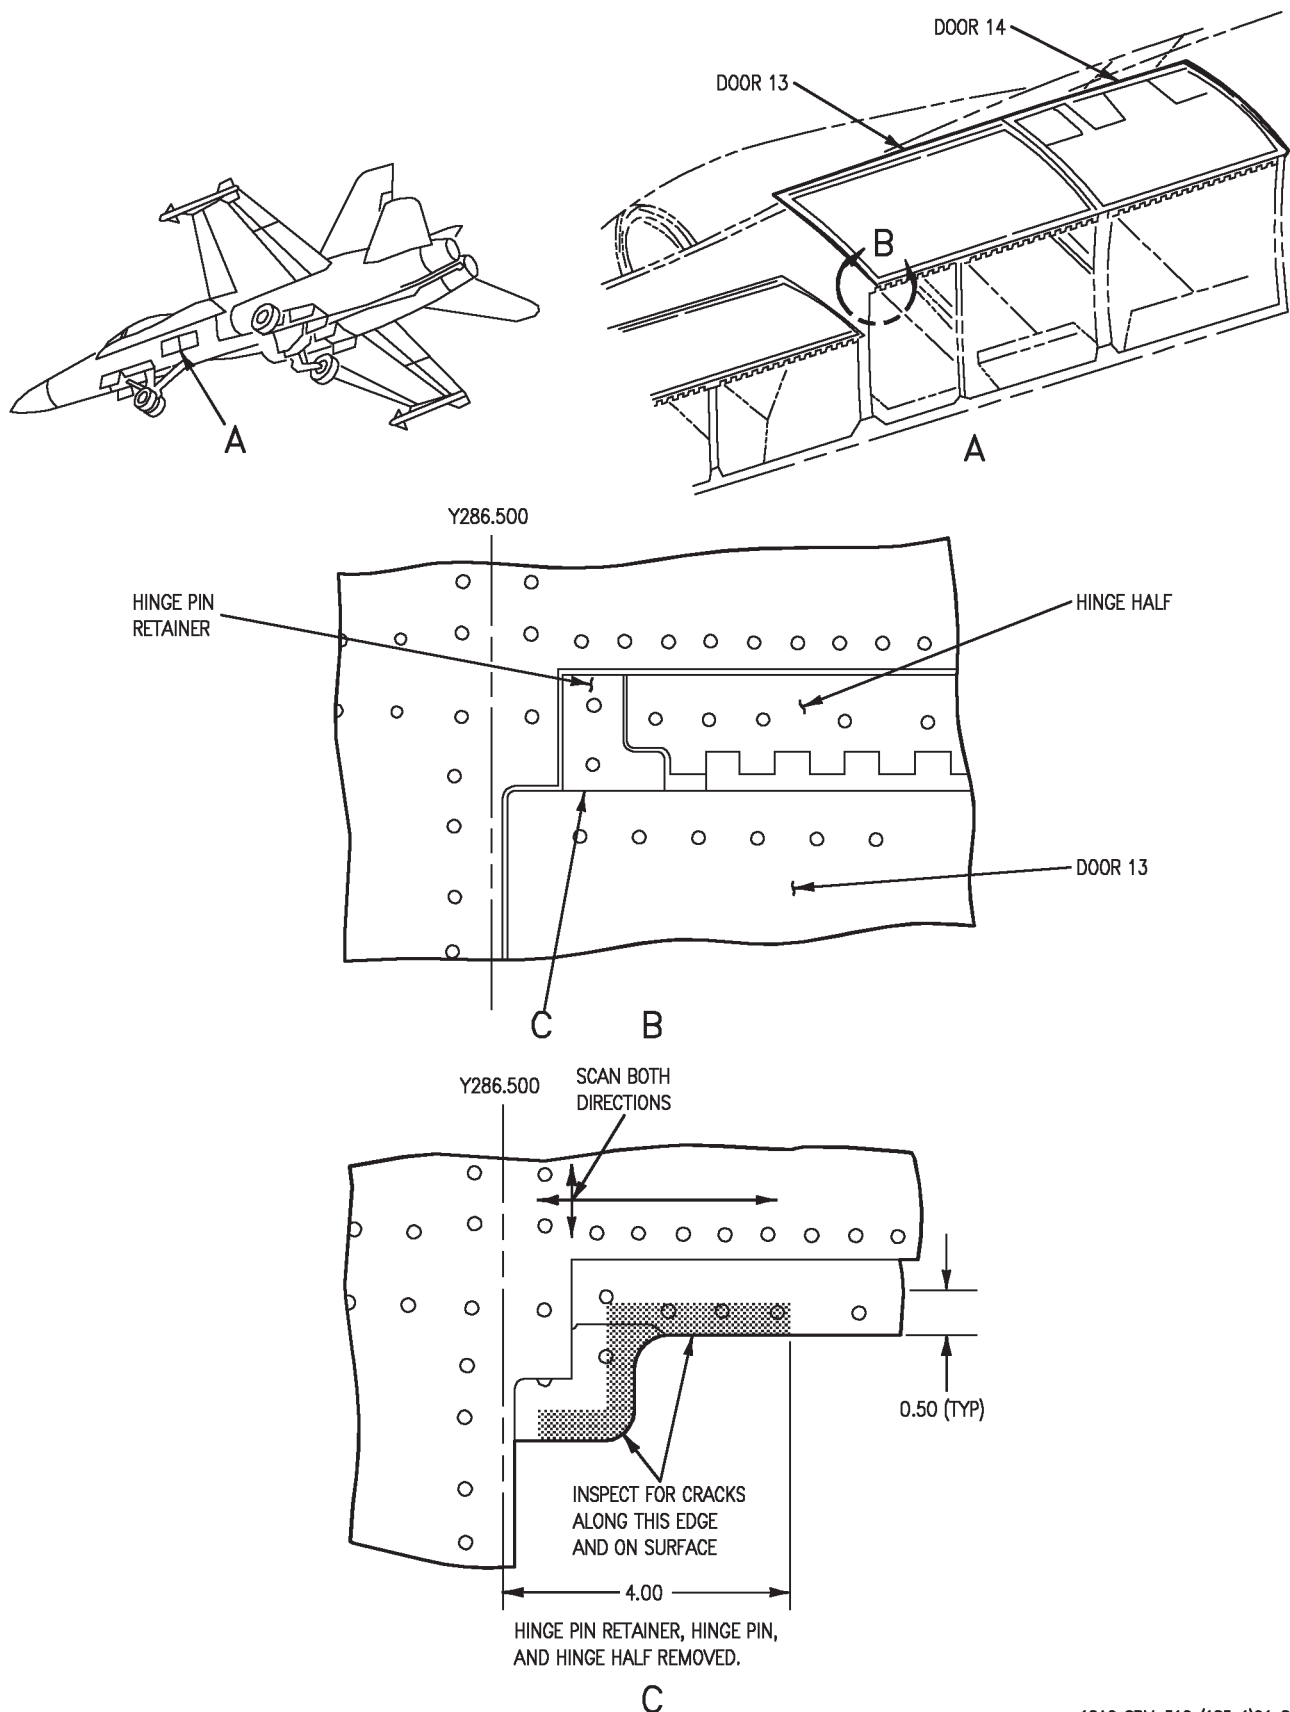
Forward Fuselage Lower Outboard and Side Longeron Inspection (Sheet 1)
